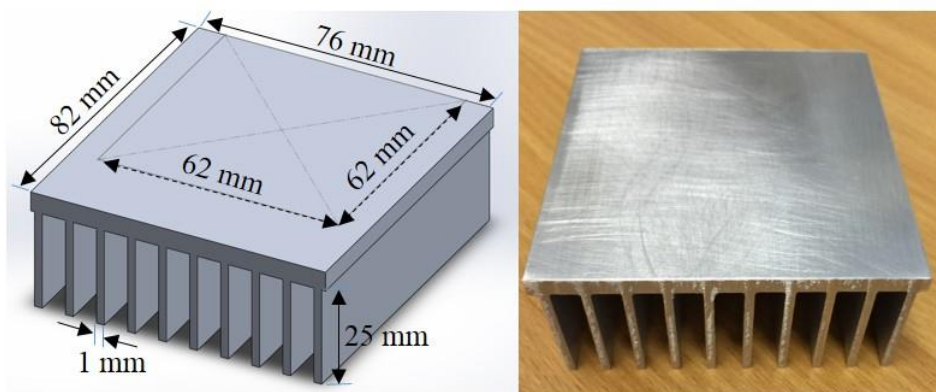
The design drawing and photograph of the aluminium condenser.
